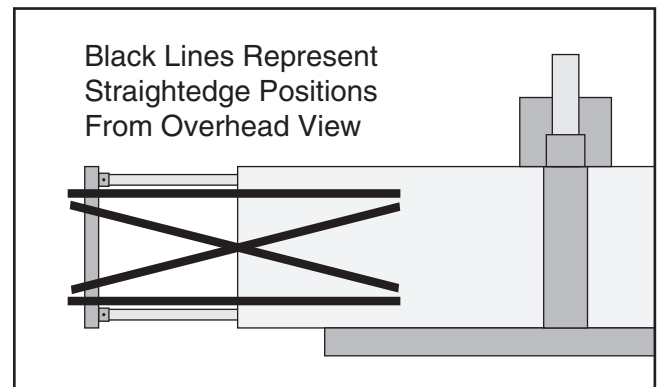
Straightedge positions for checking infeed/outfeed table extension parallelism.
